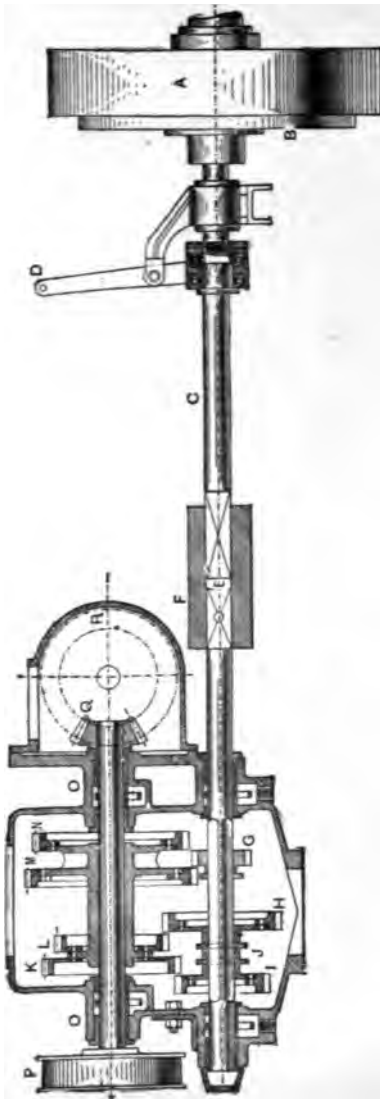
Daimler Transmission Gear. Sectional elevation
